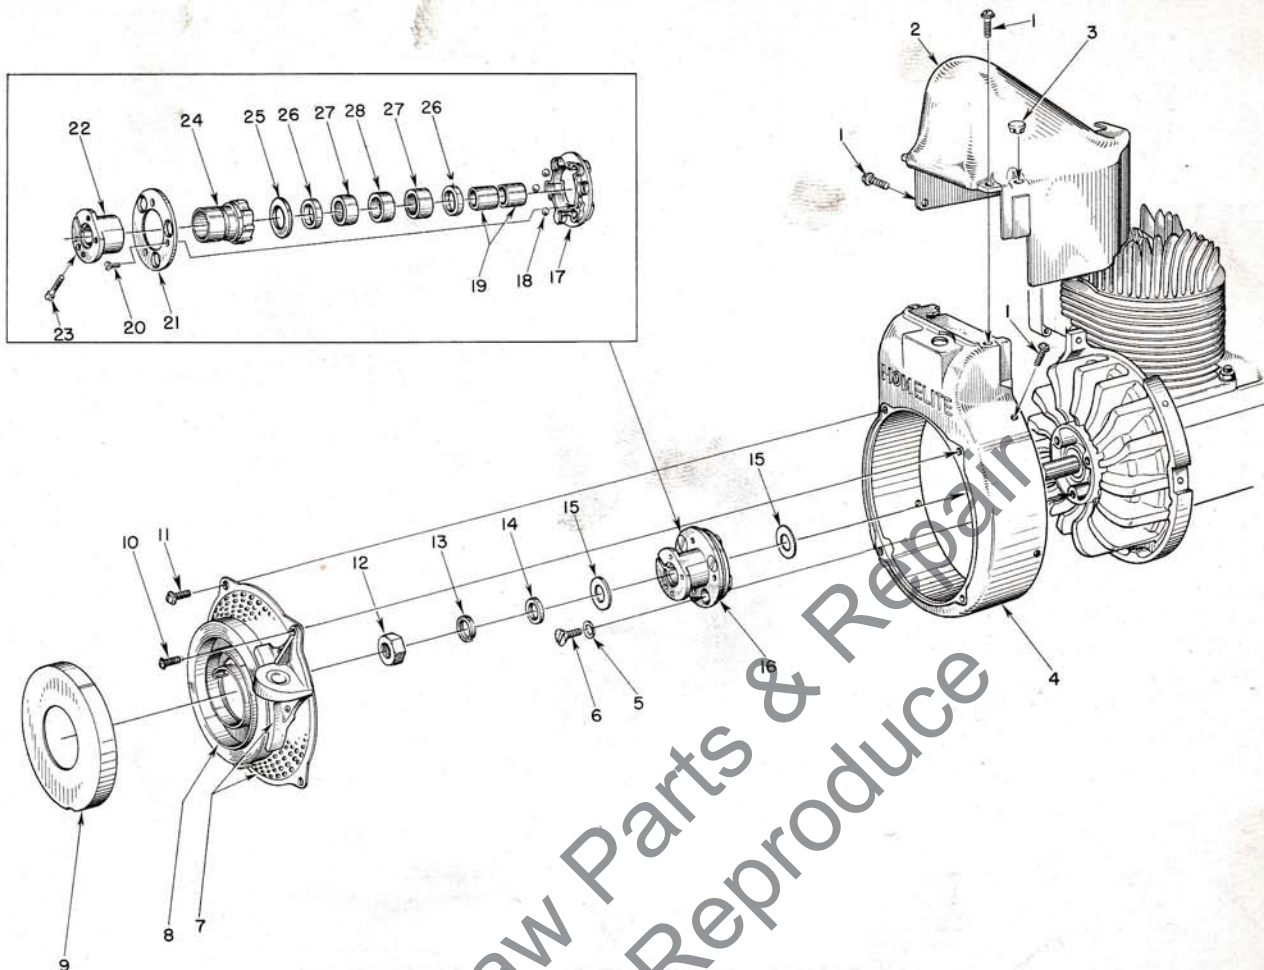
BALL DRIVE AND AIR SHROUD
